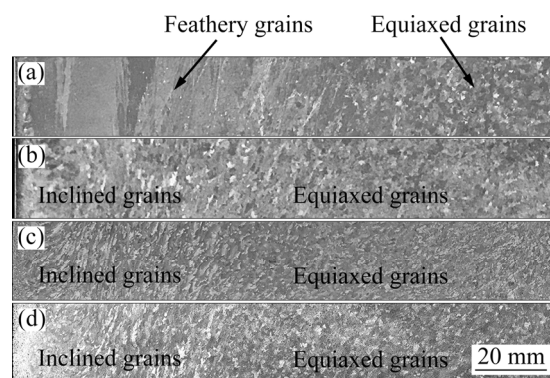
Macrostructures of ingot produced under different casting conditions: (a) Conventional DC, 65 mm/min; (b) With shearing, 65 mm/min; (c) With shearing, 75 mm/min; (d) With shearing, 85 mm/min
